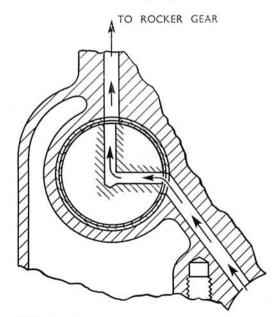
Section showing camshaft centre bearing installed in crankcase. The small hole of the bearing must be aligned with the vertical oil drilling to the rocker gear.
